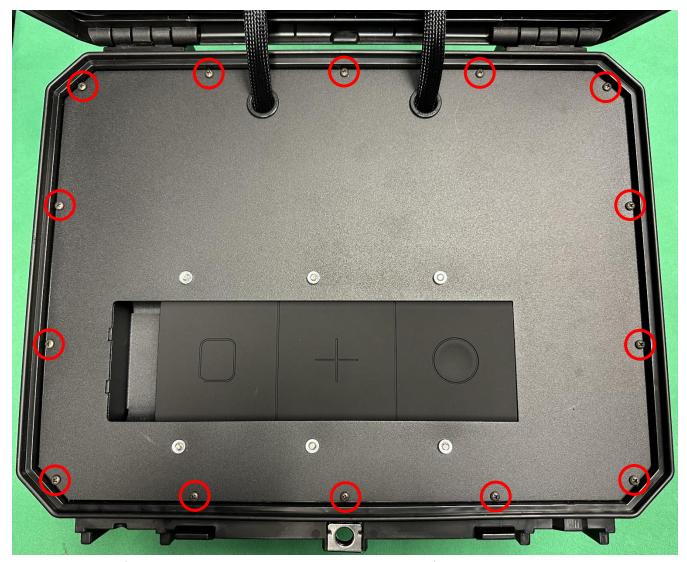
Fasten the cover plate to the case using PTA007IB screws.
